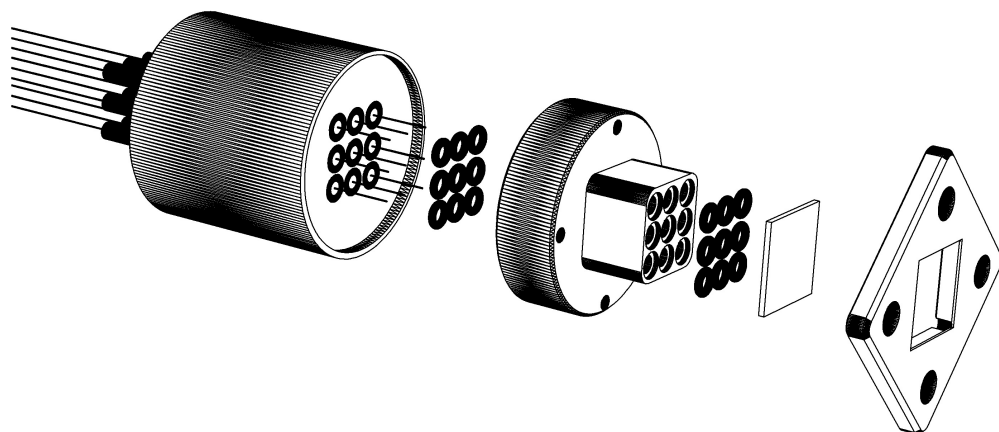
Exploded view of the biochip holder. From left to right: Polymer block containing platinum wires through small tubes, set of O-rings, reservoirs, set of O-rings, biochip and aluminium end-plate.
